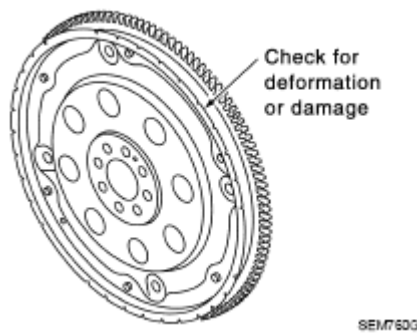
Checking Drive Plate And Signal Plate For Deformation Or Cracks
